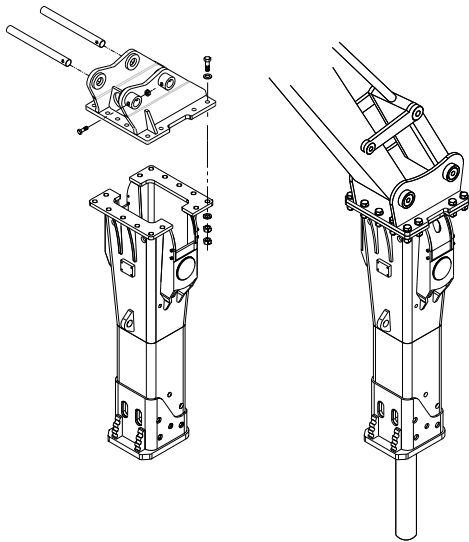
Housing Box, Mounting Bracket & Hardware (Typical)
